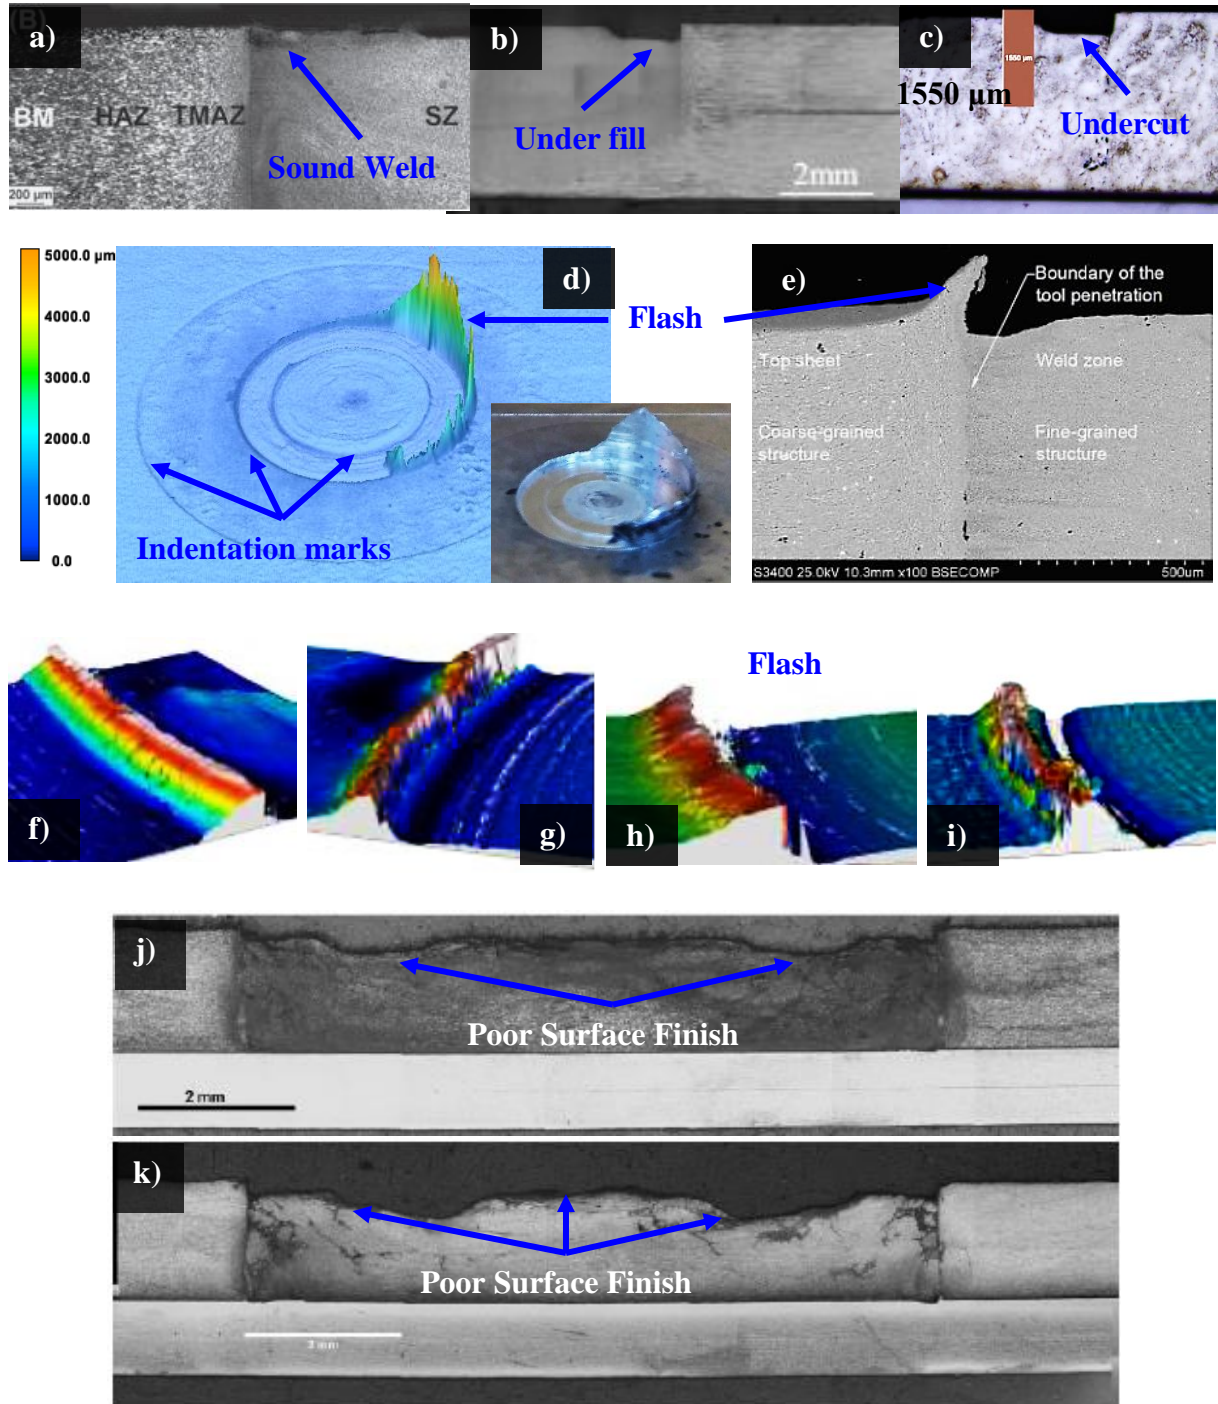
a) Sound weld with no surface defects (Amancio-Filho, Camillo, et al. 2011). b) Under fill in similar welding of 2 mm thick 2198-T8 Al alloy sheet, produced with PD=2.4 mm (Yue et al. 2017). c) Severe undercut produced by inadequate heat input in dissimilar welding of 3 mm thick AM50 to steel, produced with: PD=2.8 mm, RS=1500 rpm, PT=1 s, DT=0 s, RT=1 s. d) 3D laser mapping and photography of flash defect in dissimilar welding of 3 mm thick AM50 to bare steel, produced with PD=2.9 mm, RS=1800 rpm, PT= 1.5 s, DT=0 s, RT=1s. e) Detail of small flash formed in dissimilar welding in thickness, of 7075-T6 Al alloy (Kluz, Kubit, and Wydrzyński 2017). Evolution of flash with tool wear in similar welding of 6082-T6 after: f) 250, g) 814, h) 1080, i) 1303 spots (Montag et al. 2014). Effect of RS in the surface finish of the SZ in dissimilar welding of ZEK100 Mg alloy to DP600 steel, produced with: j) RS=1800 rpm and WT=3 s; and k) RS=3000 rpm and WT=3 s (Chen et al. 2015).
